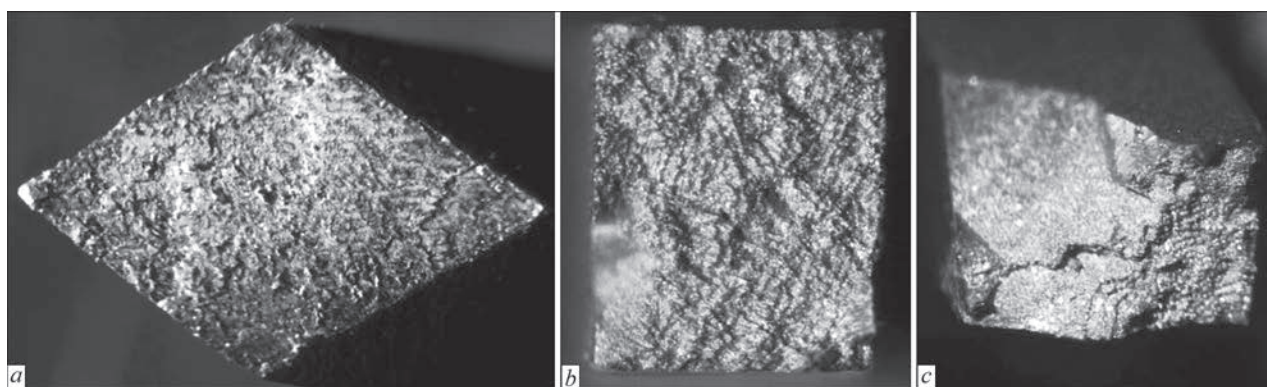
Appearance of fractures in welded joint of ZhS26 alloy single-crystal of orientation close to [011], after testing for uniaxial tension at the temperature of: a — 600 °C; b — 1050; c — 900
